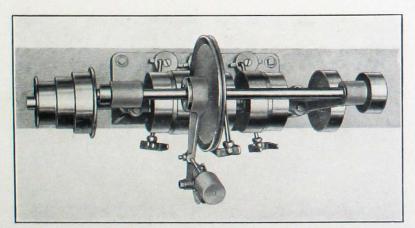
Grinding Countershaft.—Installed on Lathe Countershaft.
